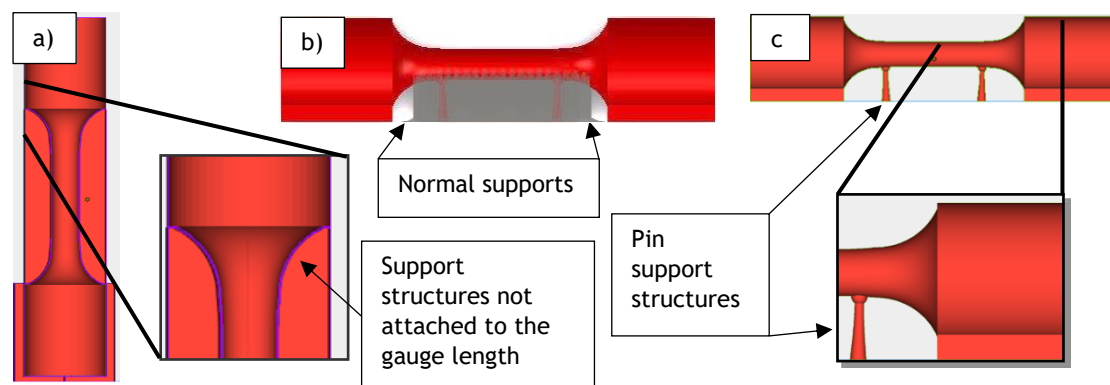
Test specimens with support structures. a) Z-specimen b) X/Y-specimens showing normal supports on gauge length c) Pin supports on X/Y-specimens
